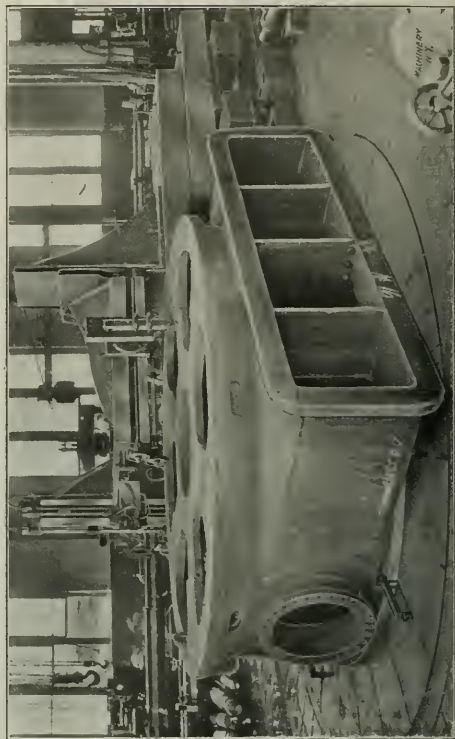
The Largest Boring Mill in the World at Work; the Regular Heavy Housing is not in use, since this Turbine Exhaust Base is a Comparatively Small Casting.
